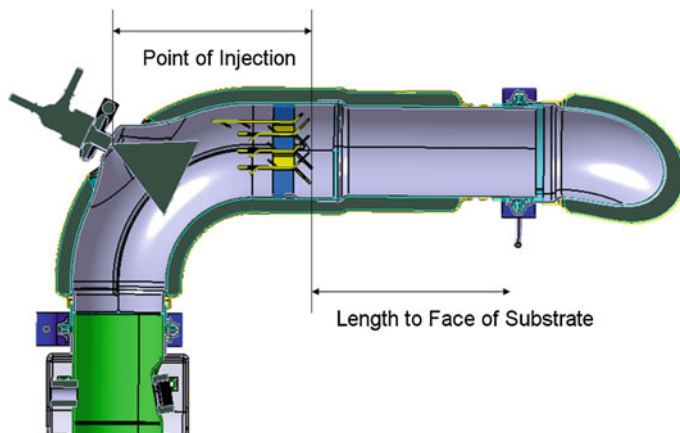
Cross section of elbow style injector mount decomposition tube
